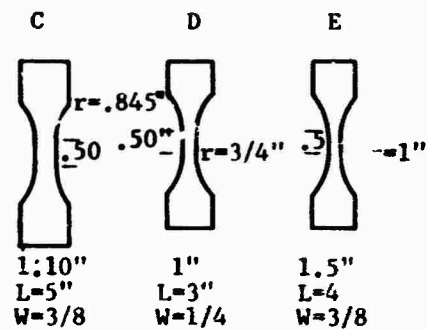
UNIAXIAL TENSILE SPECIMENS
